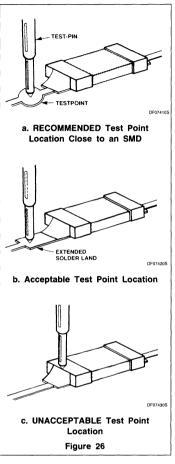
shows the recommended approach for positioning test-points in tracks close to components, and Figure 26b shows an acceptable (though not recommended) alternative where the solderland is extended to accommodate the test pin. This latter method avoids sacrificing too much board space, thus maintaining a high-density layout, but can introduce the problem of components moving ("floating") when reflow-soldered. The approach shown in Figure 26c is totally unacceptable since the pressure applied by the test pin can make an open-circuit soldered joint appear to be good, and, more importantly, the test pin can damage the metallization on the component, particularly with small SMDs.
